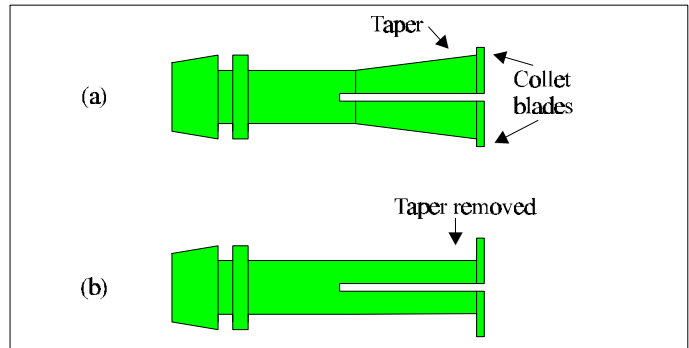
Collet blades (a) nominal geometry (b) geometry with taper removed.
